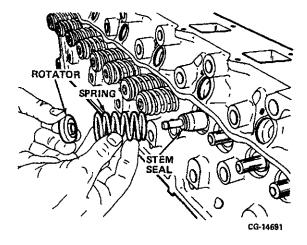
Remove Valve Rotator, Spring and Stem Seal Assembly
